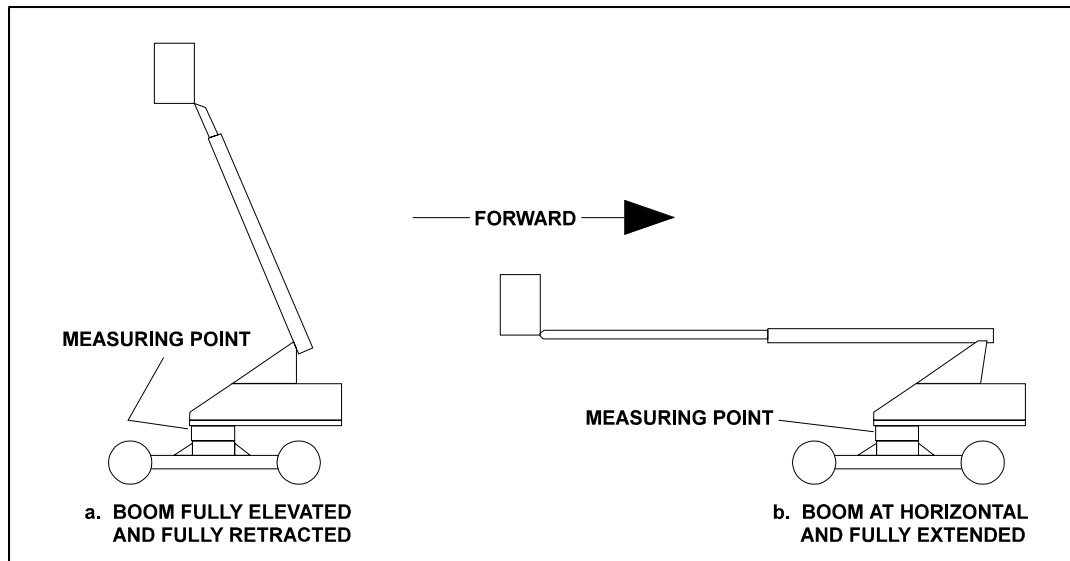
Swing Bearing Tolerance Boom Placement
